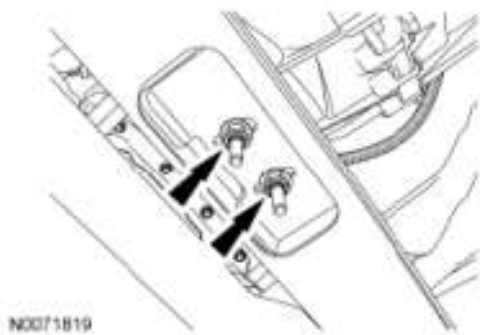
Locating O-Rings On Transmission Fluid Cooler Tubes
